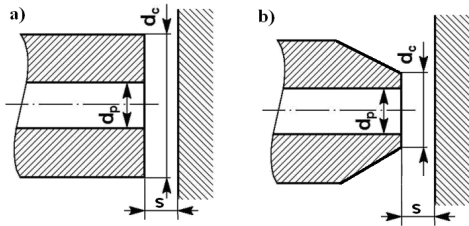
Measuring nozzle with wider a) and narrower b) head surface [12]
